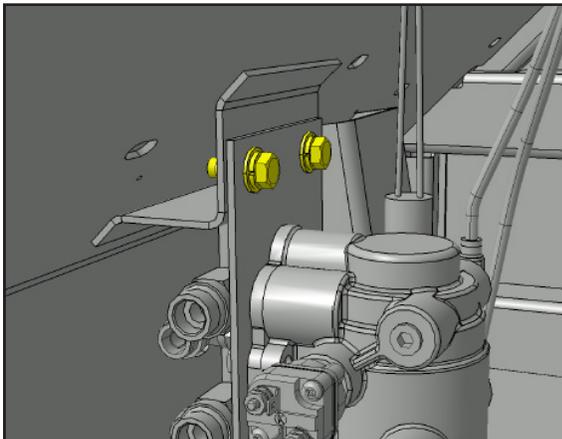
Remove the two sets of 3/8" bolts, lock washers, and flat washers from the top of the bracket.
